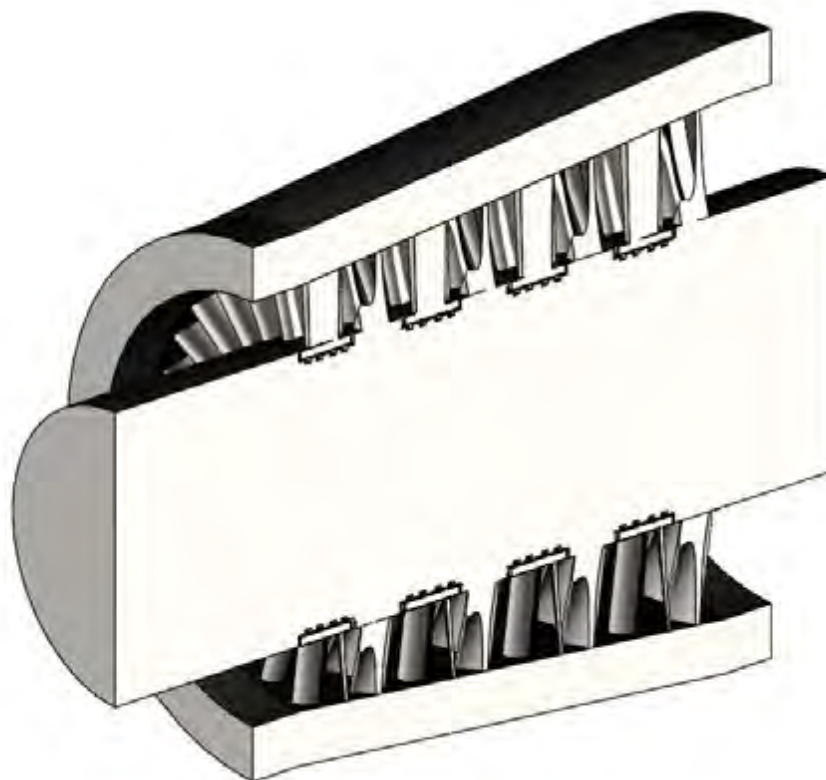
Turbine cross section. A detail drawing is provided in Appendix C.
